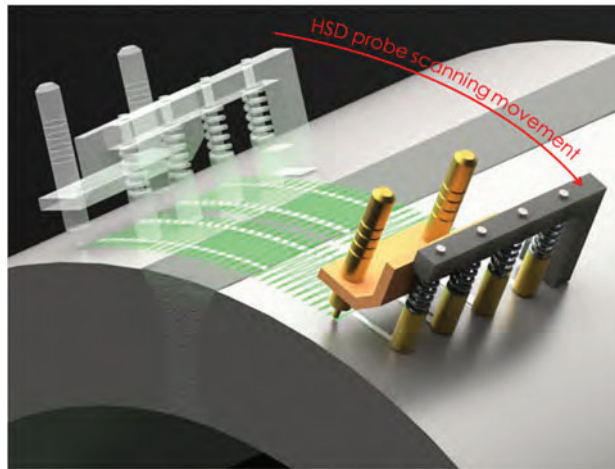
HSD Testing is being performed across the ERW Seam of a pipe joint.
